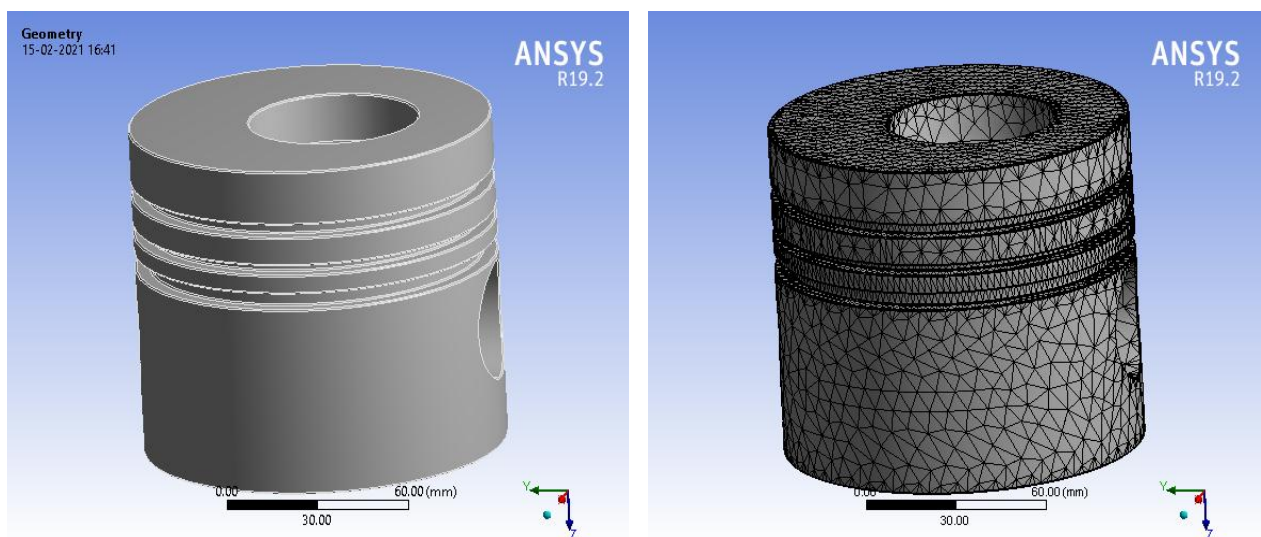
Diesel engine Al 6061 piston model import into Fig.4.2 Diesel engine Al 6061 piston meshing model
